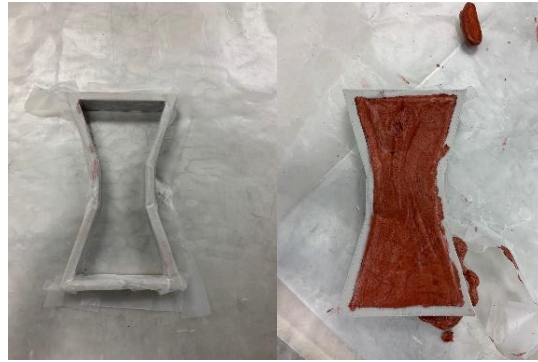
3D printed Tensile Testing Mold (left) and I-H foam cured inside mold (right).
